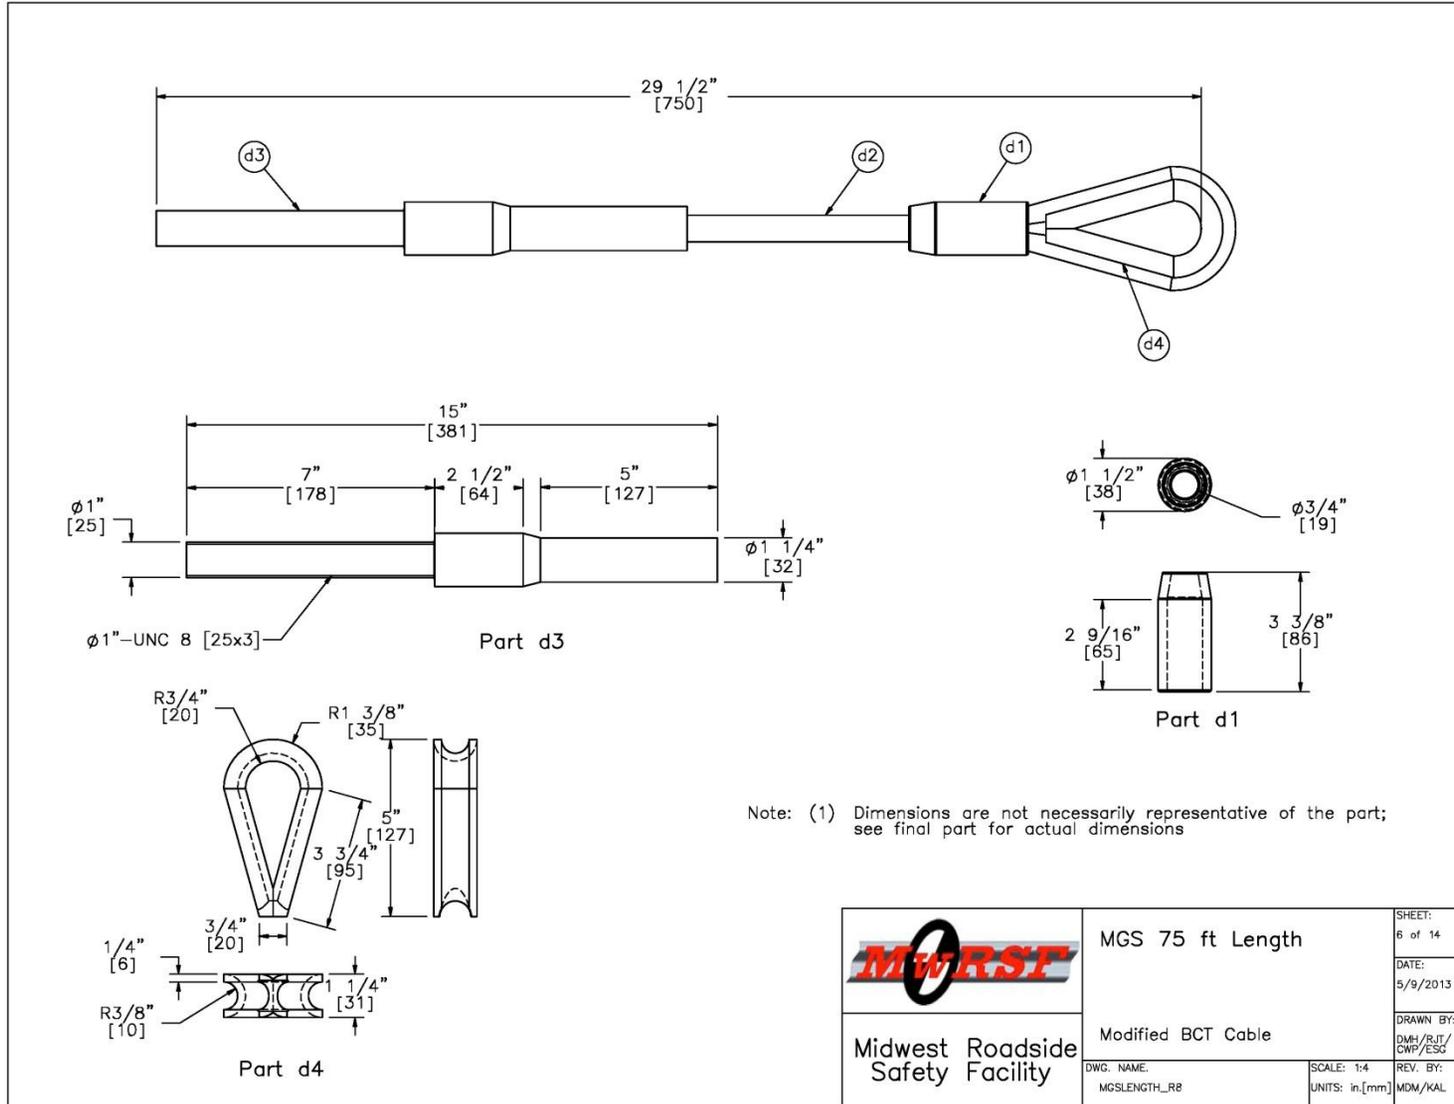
Modified BCT Cable Details, Test No. MGSMIN-1
